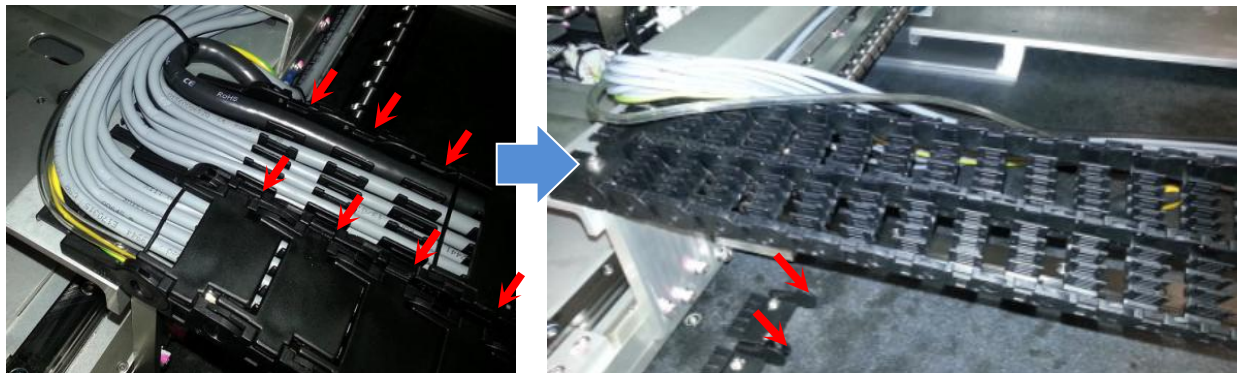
Stepper Motor Cable (Y Axis Wide E-Chain) Reference Picture
